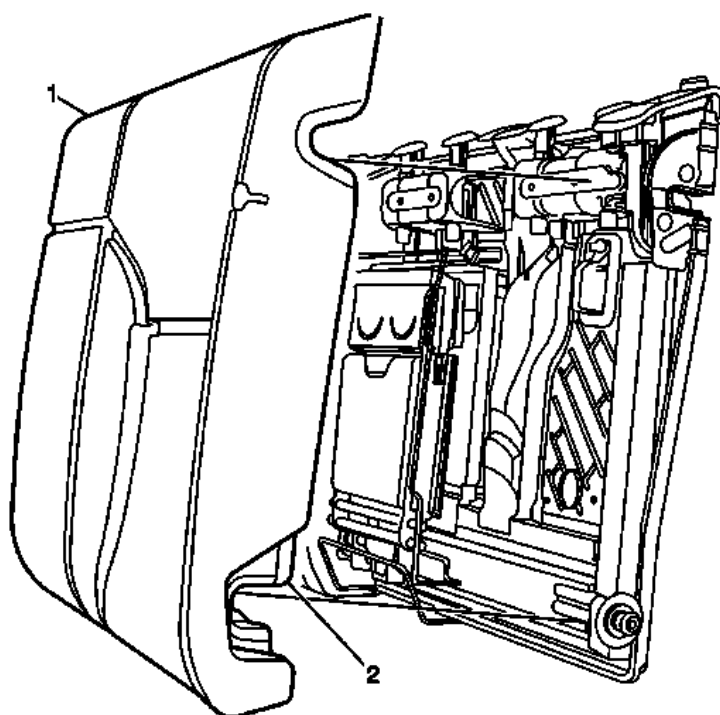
Rear Seat Back Cushion Cover And Pad (60% Side)
